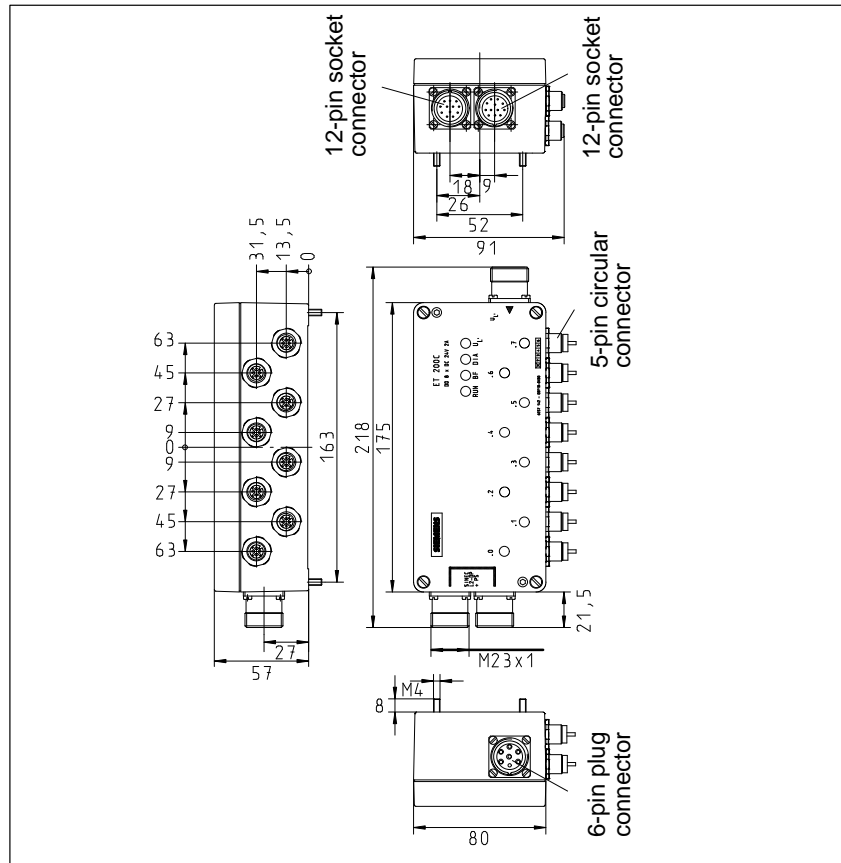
Digital Output Module ET 200C; DO 8 × DC 24 V/2A; Dimension Drawing
